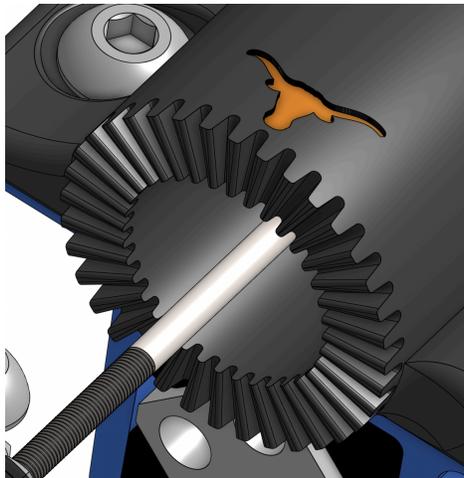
Pivot joint mechanism teeth view (frame joint hidden).
